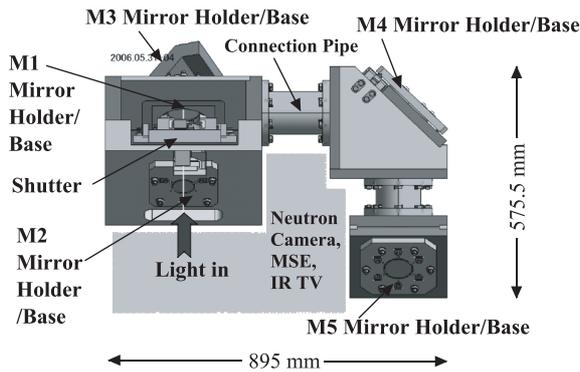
Mechanical design of the front end optics in the equatorial port.
